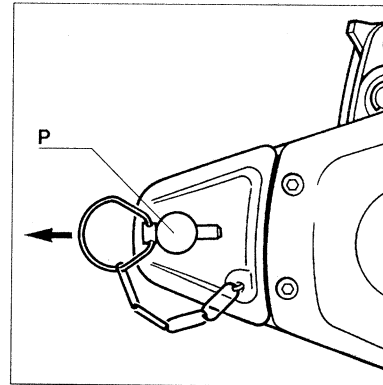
TU-32. Anchor locking pin in unlocked position for removing the anchor pin.
